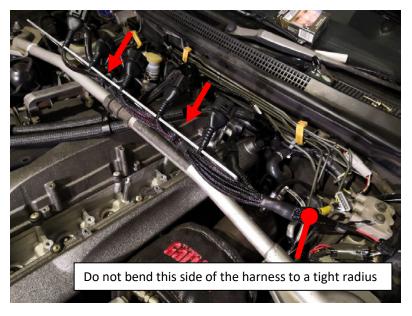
Pre-assembly of the ignition harness to the mounting plate
